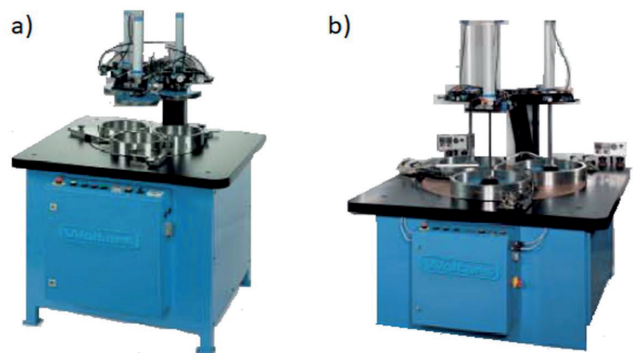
Single-disc lapping machine: a) model 3R-600, b) model 4R-1200 (Peter Wolters) [1]
